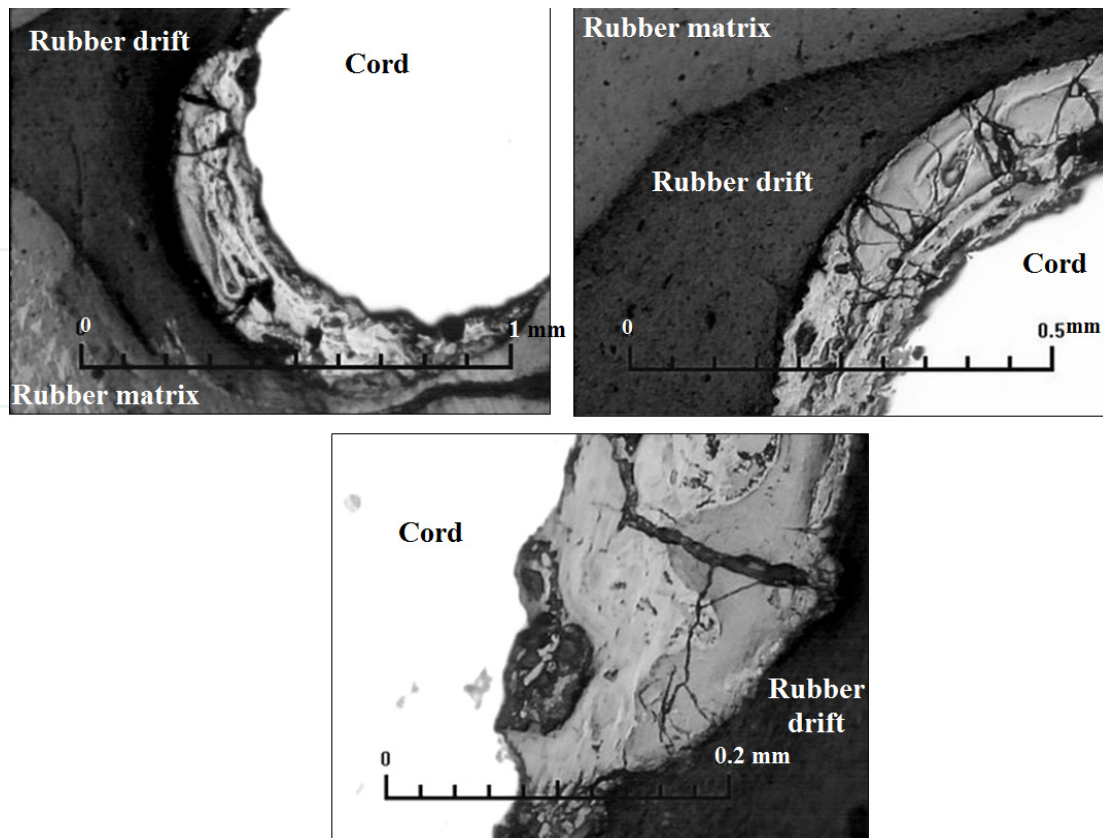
Damaged adhesive bond between thin-wire steel cord 0.94 mm and rubber drift after corrosive attack (with extreme corrosion and tensile loading) with detail of oxide on cord surfaces
